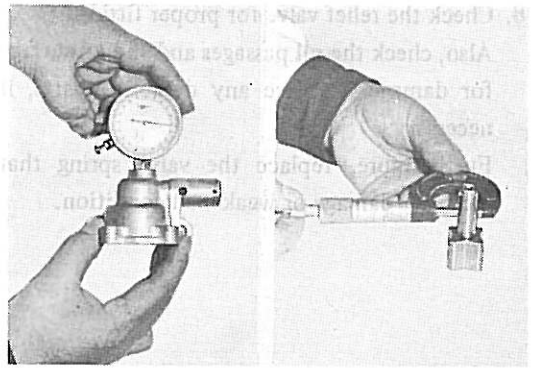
Checking Oil Pump Shaft-to-Body Clearance
